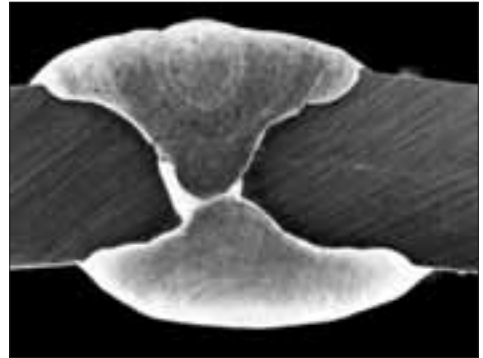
Incomplete penetration of a 2205 MIG weld
